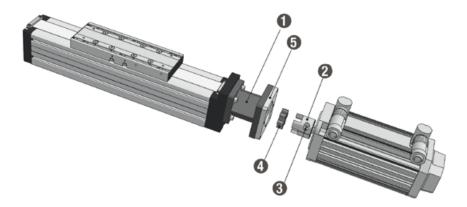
Drive assembly on Linear Axis with screw drive and coupling cone
